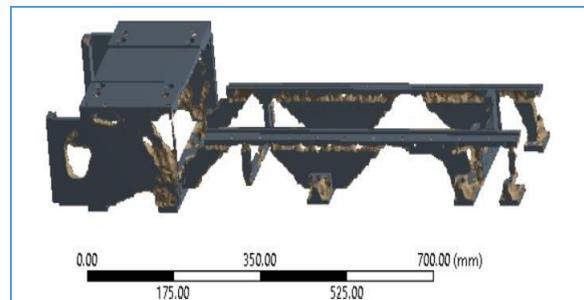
Optimized Structure of the Existing Steel Reinforcement
